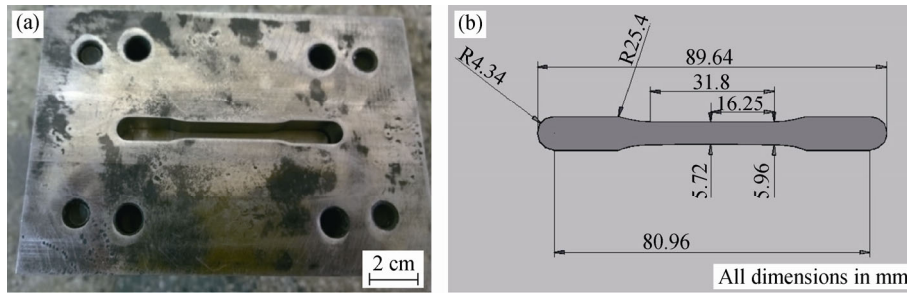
Dog-bone shape: (a) die; (b) dimensional details.
